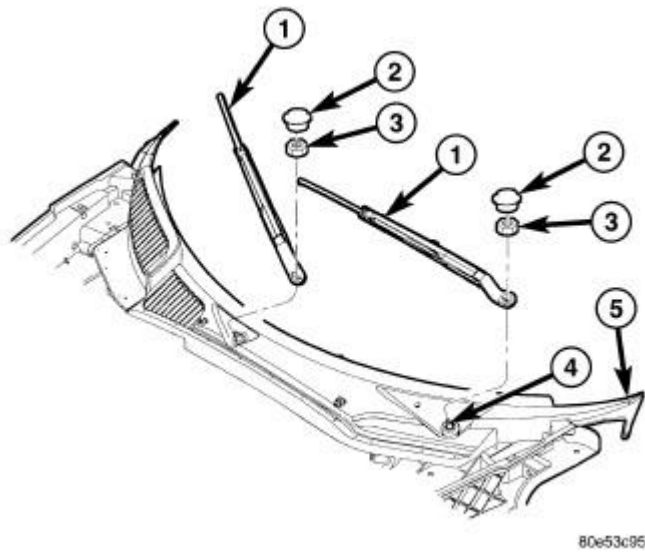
Windshield Wiper Arms, Nut Cap & Nut
